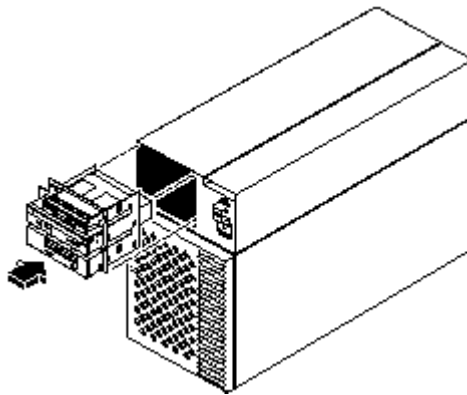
Sliding the Removable Media Assembly Into the System Chassis
